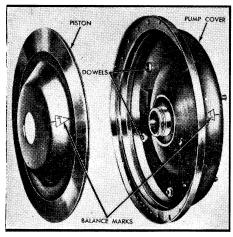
Lockup clutch piston and converter pump cover balance marks and dowels
